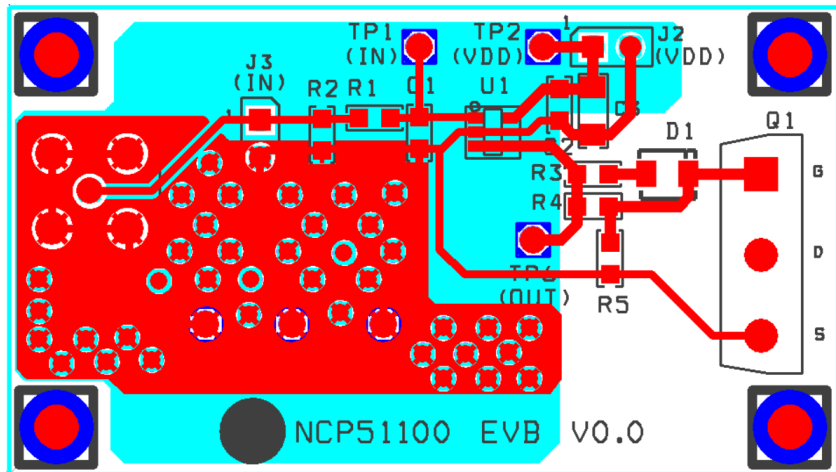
Printed Circuit Board (Top & Bottom Layer)
